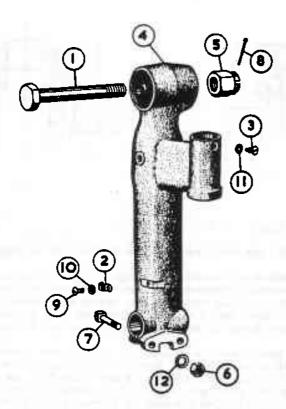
THE YOKE TO LOWER TRIANGLE LEVER.
